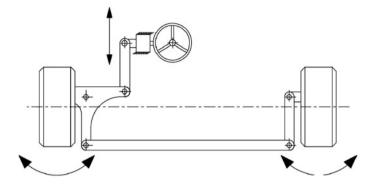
Connection between gear and front wheels in utility vehicles with rigid front axle
